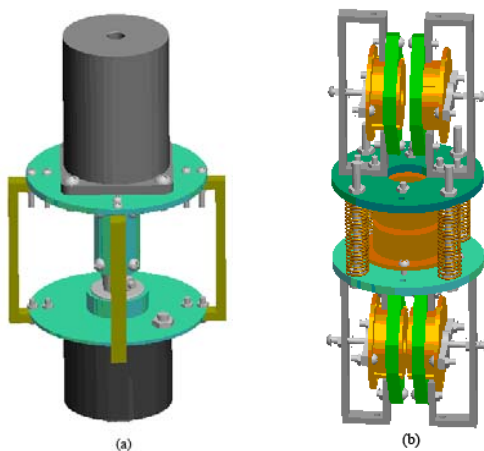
(a) Removing measuring mechanism; (b) EDM removing plug mechanism.
